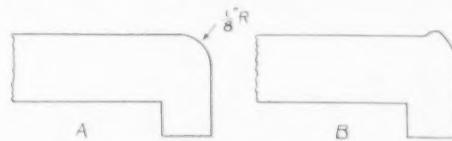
Sketch of Fillets of Steel Barrel for Adjustable Blade Propeller. (a) Fillet as Shown on Drawing, (b) Fillet as Machined on Barrel. Fillet Actual Size.
